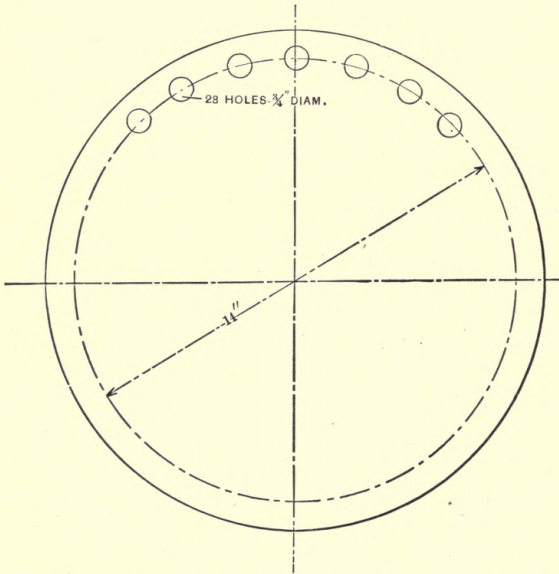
Simplified Method of Dimensioning Holes Drilled in a Circle.
